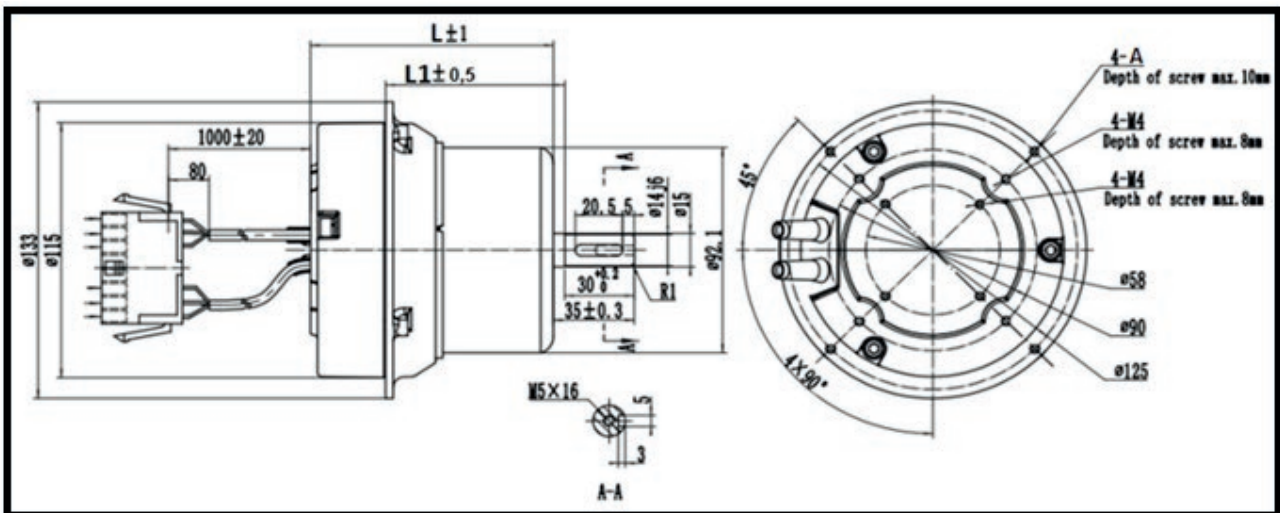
EC092 motor series DIMENSIONS (all dimensions are given in mm units)
